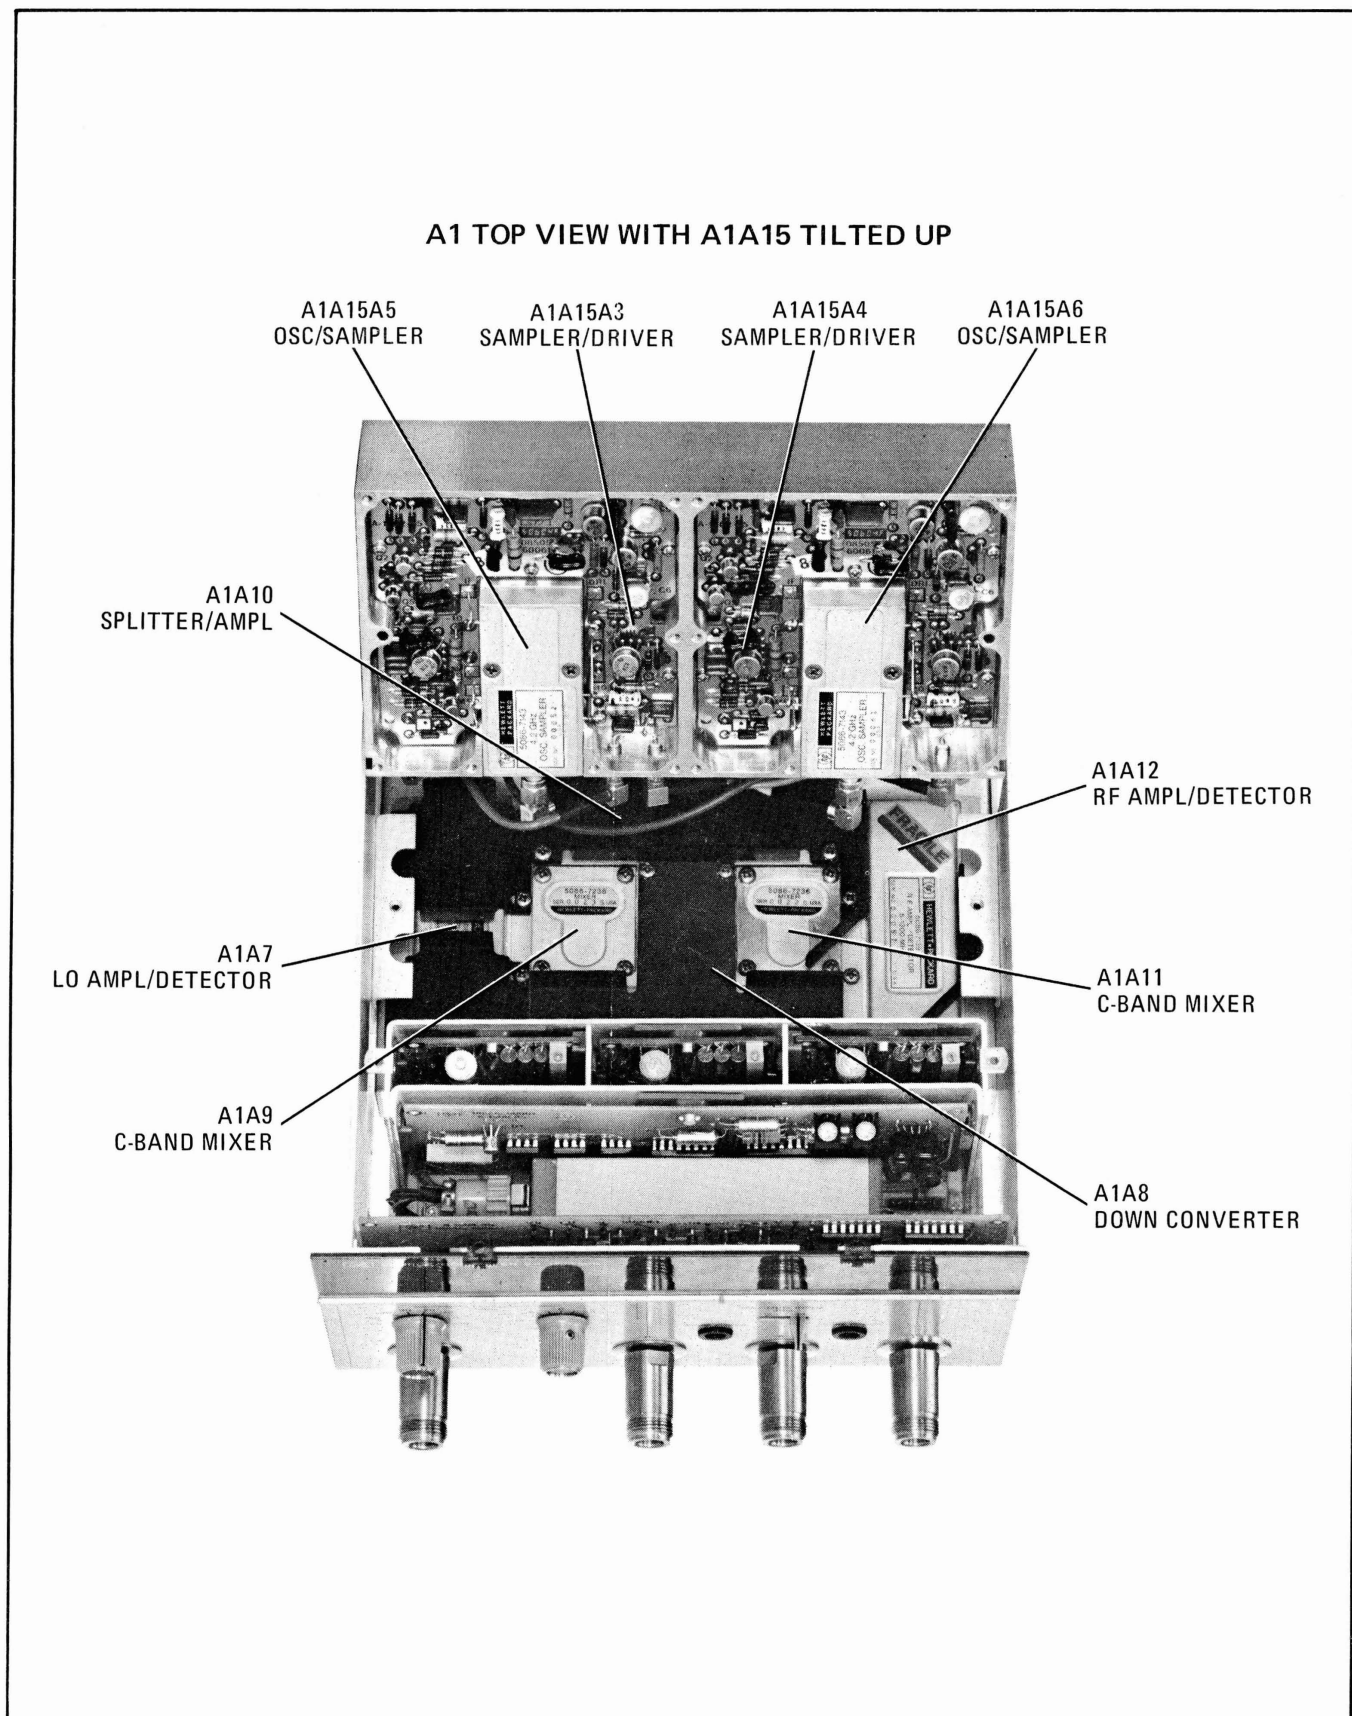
A1 Disassembled Showing Internal Assemblies
